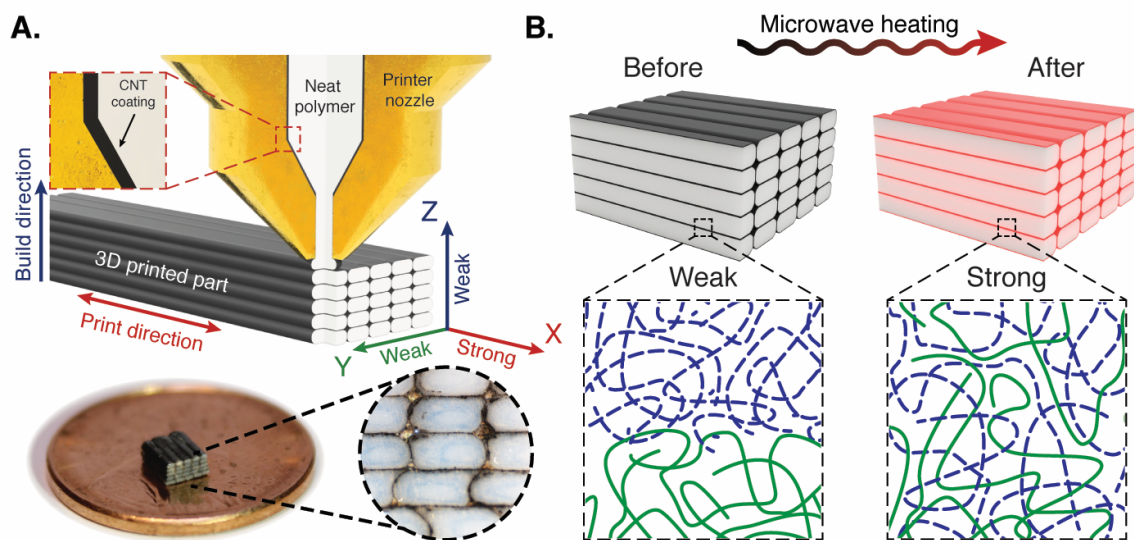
(A) 3D-printed parts tend to display weak tensile properties in the y and z directions due to poor interlayer welding. To address this, we coated thermoplastic filament with a CNT-rich layer; the resulting 3D-printed part contains RF-sensitive nanofillers localized at the interface. (B) When a microwave field is applied, the interface is locally heated to allow for polymer diffusion and increased fracture strength.
